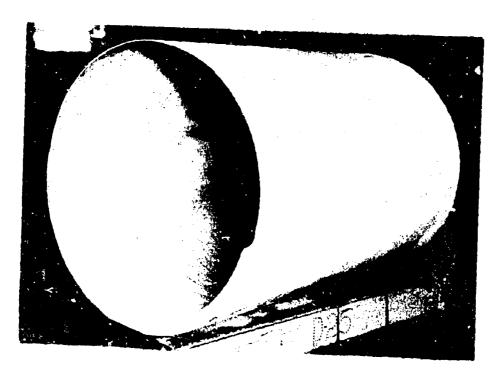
Rigidized Cylindrical Test Specimen, c.(1)
